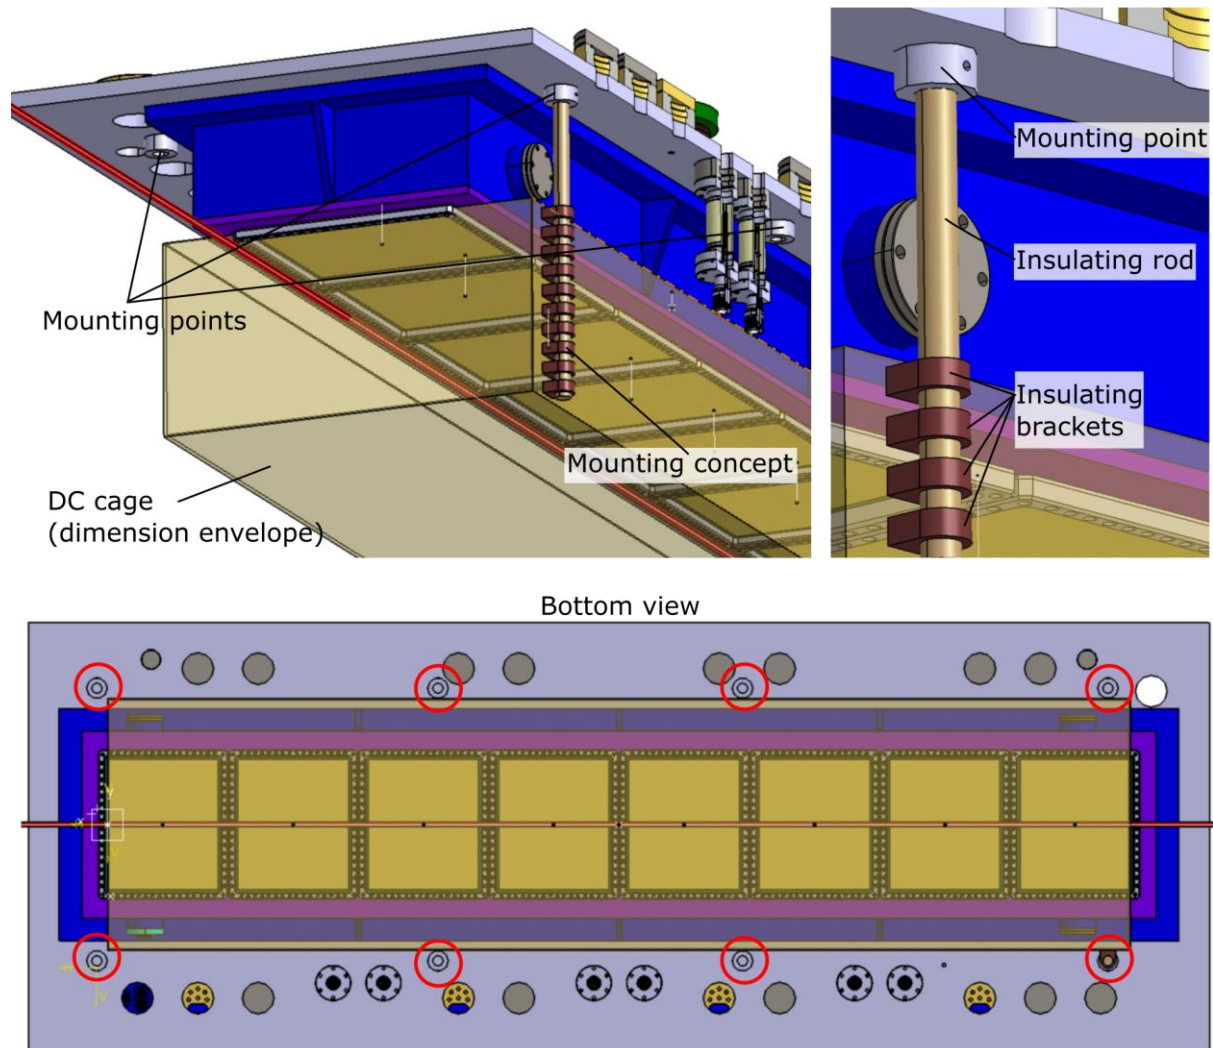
Conceptual layout of mounting points for the DC cage assembly in the stopping region
